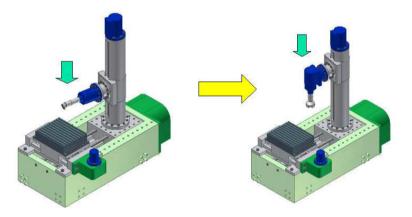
The Reconfiguration of a 3-Axis Boring Machine to a 3-Axis Milling Machine [55]
